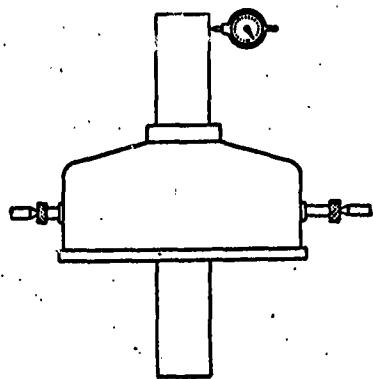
Diagram showing inspection for perpendicularity of axle-pin holes to ball-bearing bore.
